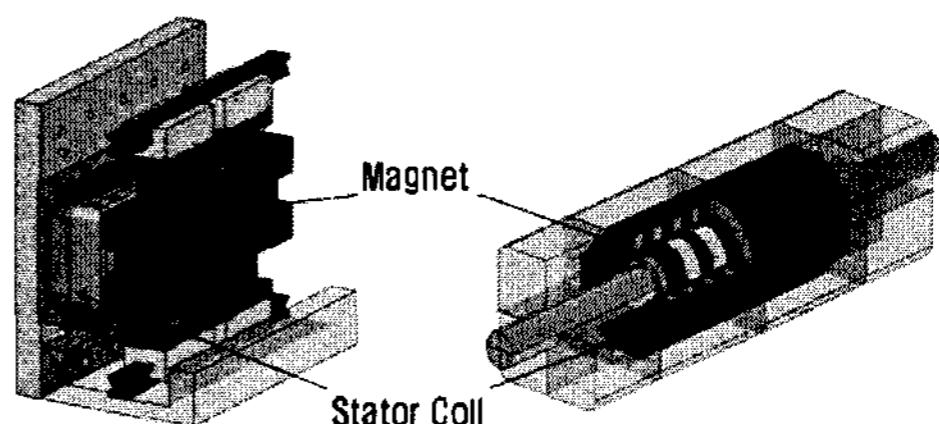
Shape of Flat & Cylinder type Linear Generator
